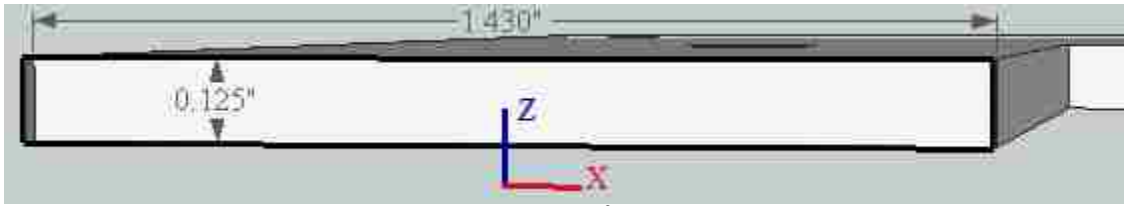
Cross sectional view of the 20x20 cm² lower trimmer aluminum plate illustrating the thickness and lateral in-plane and cross-plane dimensions of the plate. The lower trimmer is square, such that all non-hole dimensions are equal in the in-plane and cross-plane dimensions.
